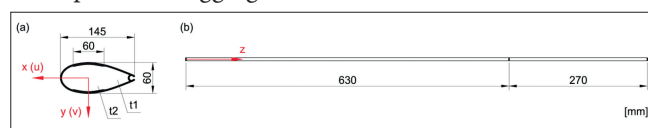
Dimensions of the mast: (a) cross-section, (b) side view
